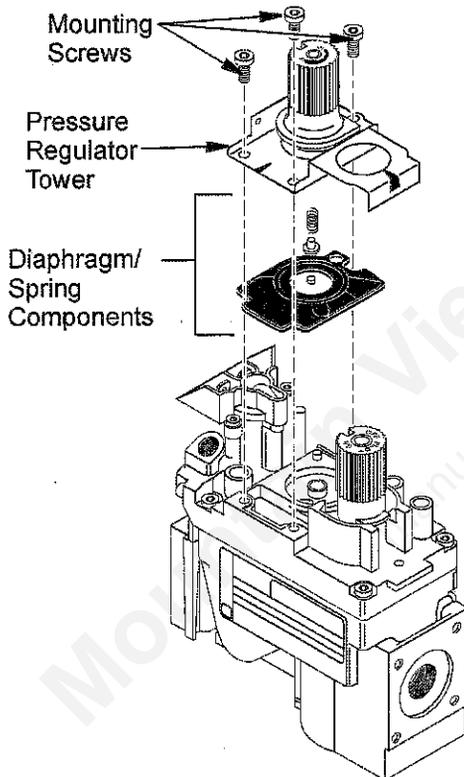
Removing Mounting Screws, Pressure Regulator Tower, and Diaphragm/Spring Components
